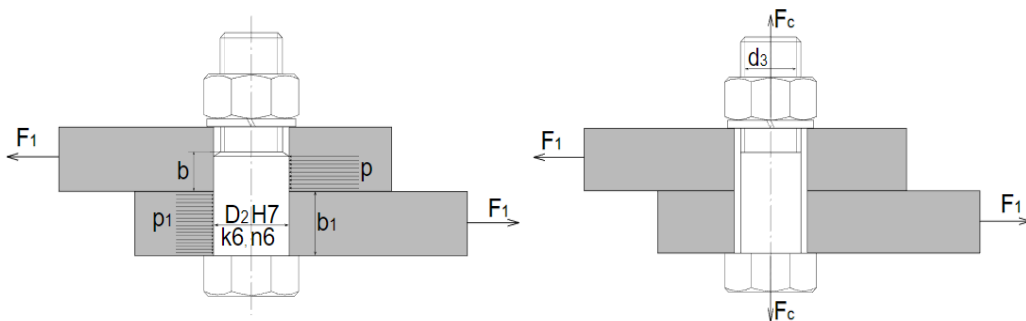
a) Fitted bolted joint; b) Clamped bolted joint
